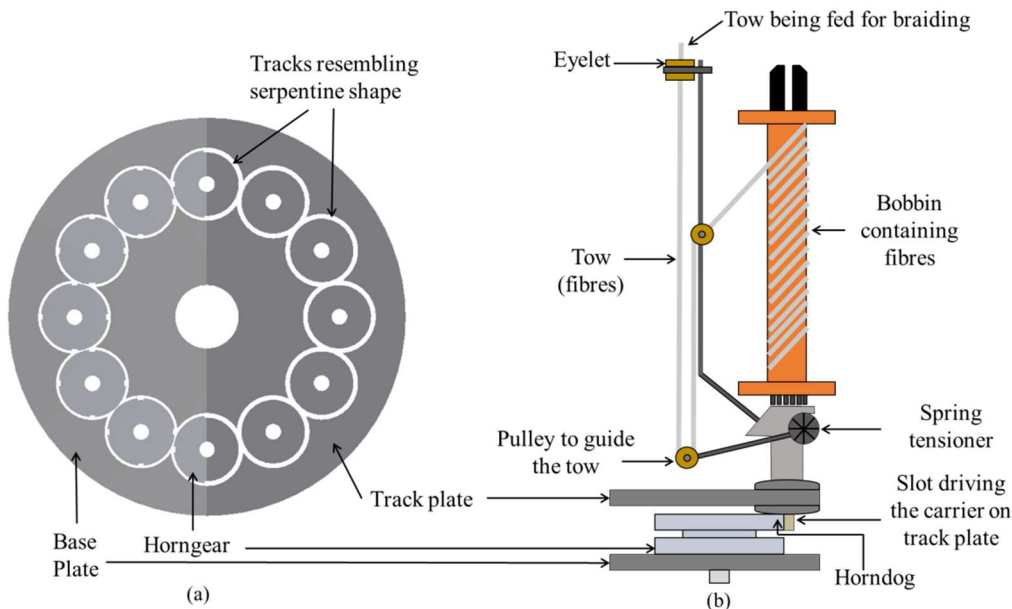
Illustration of a braiding machine showing the (a) track plate and (b) Carrier mounted with a bobbin.
